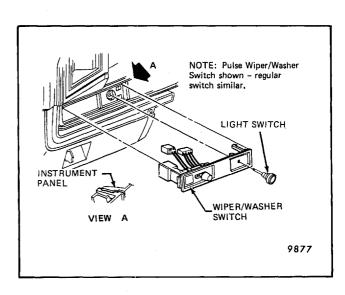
Windshield Wiper Switch Installation - Chevrolet B Styles - Pulse Type
